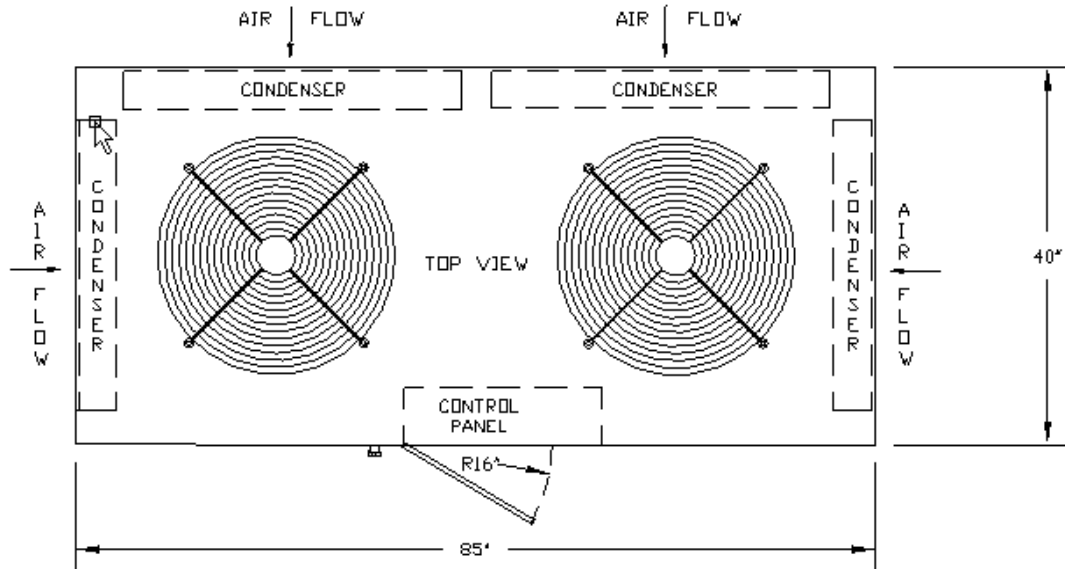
Overhead View of PAC180D (Drake Refrigeration)
